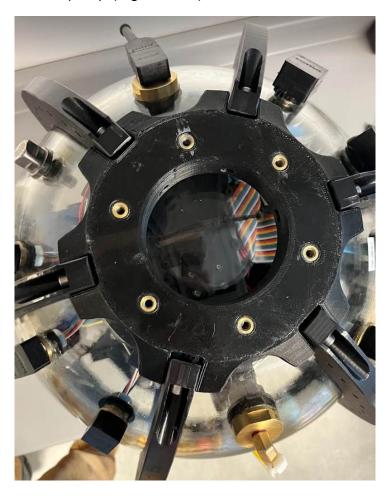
A photograph of the top joining component holding the ribs with 6 screws. These parts retain the glass pressure housing within the platform frame. A second joining component is found on the bottom pole of the sphere.
